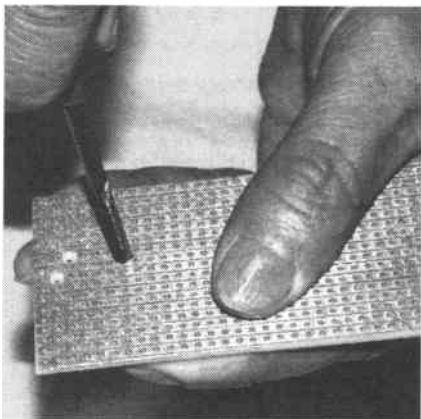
Using the special tool provides the easiest way of making breaks in the copper tracks.
